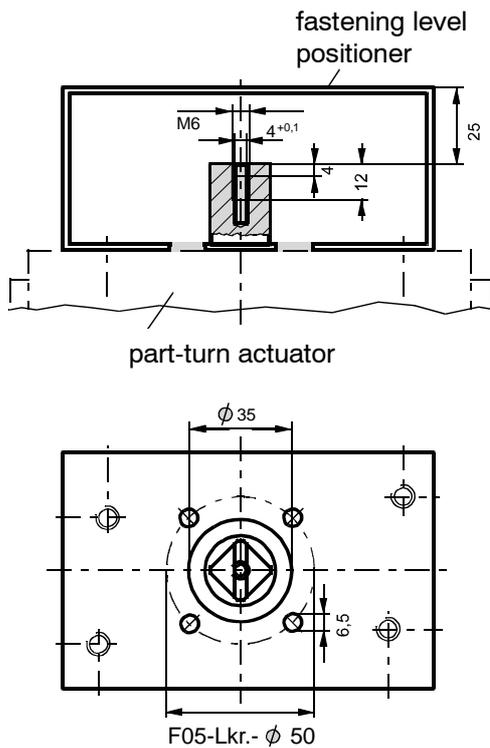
Attachment of part-turn actuator, mounting console (scope of delivery actuator manufacturer), dimensions
